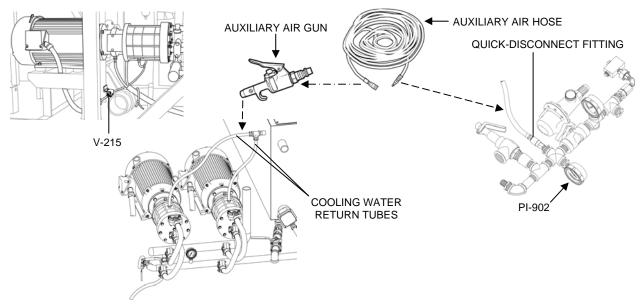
High Pressure Pump Drain Valve and Cooling Water Return Tubes.
